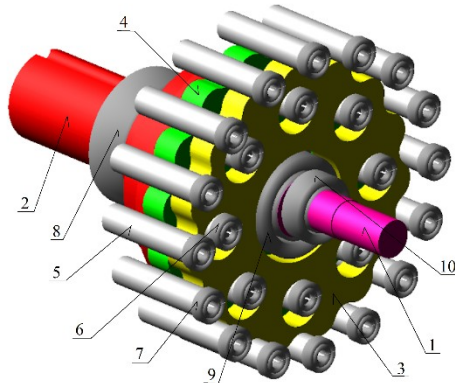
The MDM in MSC Adams. Input shaft (1), output shaft (2), external cycloidal gear (3), internal cycloidal gear (4), external sleeve (5), bushing at the internal sleeve (6), bushing at the external sleeve (7), rigid bearing at the output shaft (8), bushing between the external cycloidal gear and the input shaft (9), rigid bearing at the input shaft (10)
